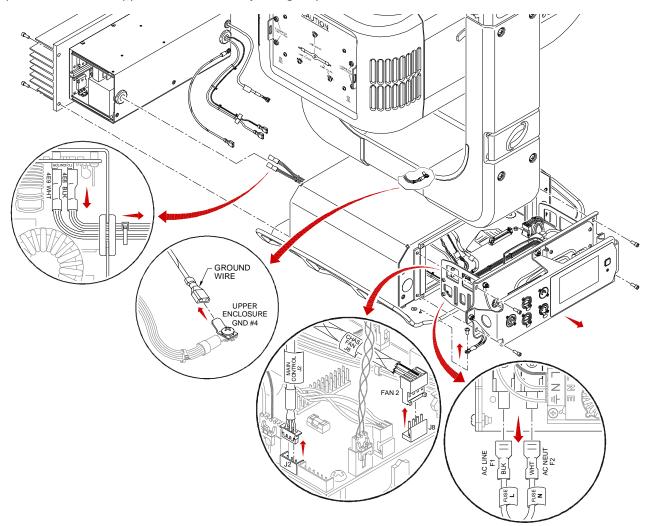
Removing Interface/LVS and Ballast Assemblies and Disconnecting Wiring
